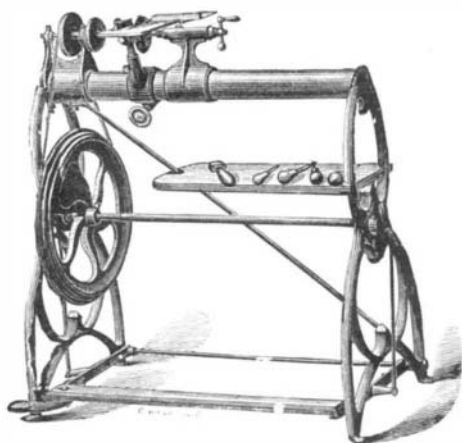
LATHE WITH CIRCULAR SAW ATTACHMENT.
